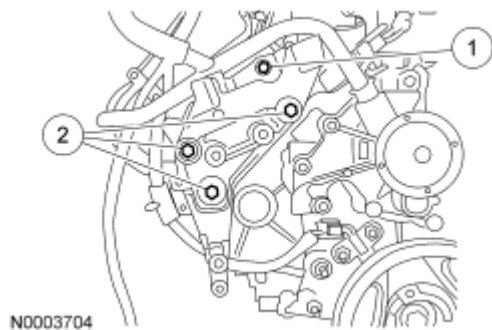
Identifying Power Steering Pump Bracket & Mounting Bolts
